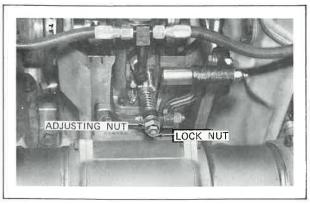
FUEL PUMP RACK ADJUSTMENT - NUT AND LOCKNUT TYPE ADJUSTABLE LINK.
